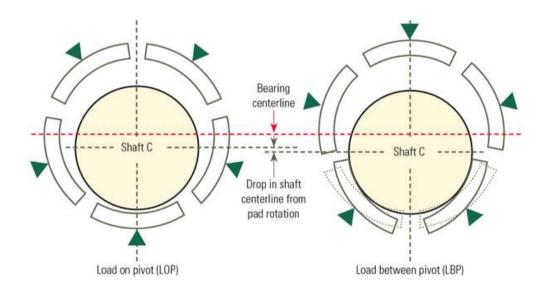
c Shaft must stay centered. Relocation of shaft center in a segmented bearing while rotating can cause vibration [5].
